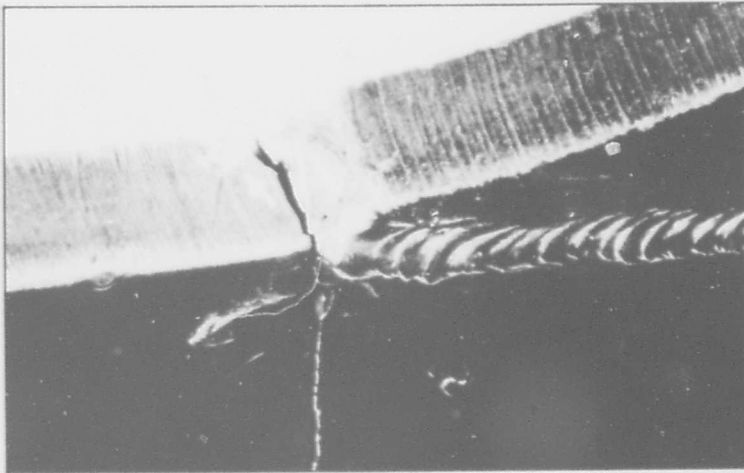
Source of fracture shown in Figure 3, viewed from inboard and above. Arrow shows globule of weld metal on edge of sheer strake plate. x 1.
